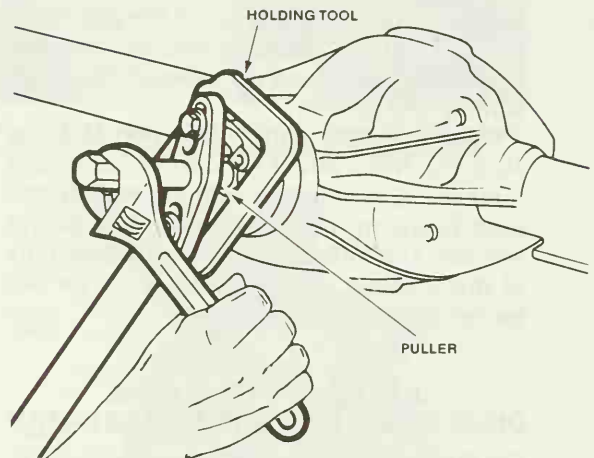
The companion flange is removed from the pinion splines with a puller. (American Motors Corporation)
